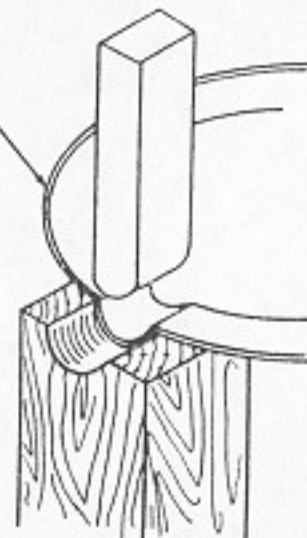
The single-groove fluting stake is far more commonly used than the multiple-groove stake.
